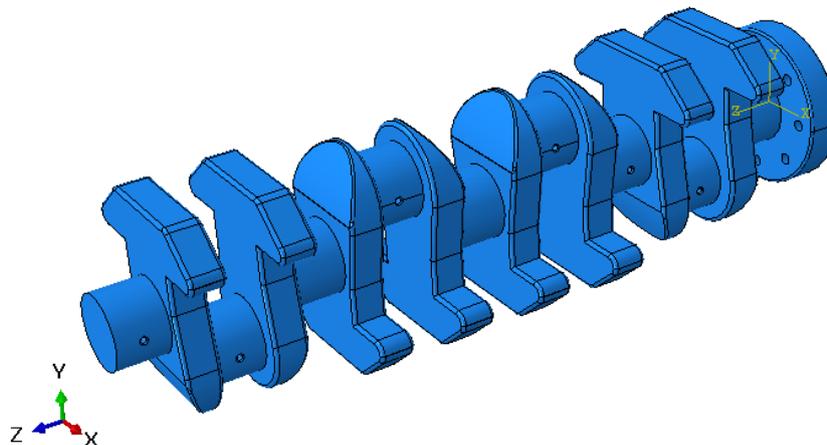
Assembly representation of the crankshaft. Source: Authors (2019)
